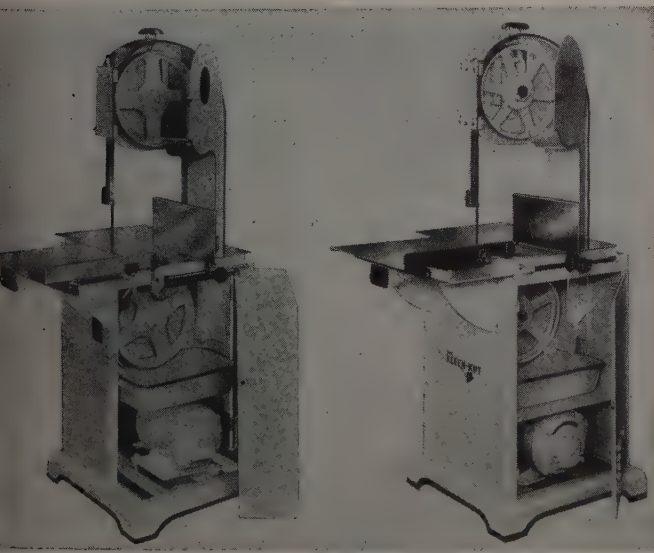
Original welded design (left) and latest welded design (right) with covers open to show interiors.
